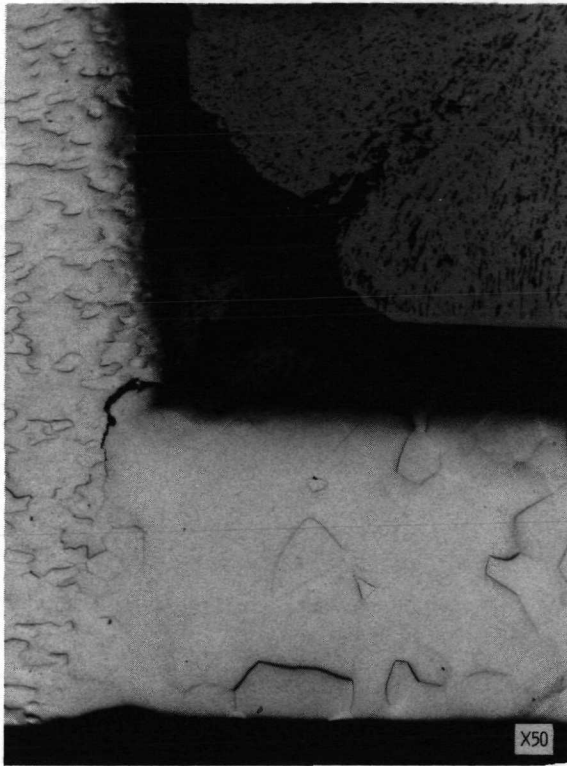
Section of electron-beam welded joint between chemically vapor deposited tungsten cladding and arc-cast tungsten end cap on side opposite failure showing initiation of cracking from inside corner. (Reduced 8 percent in printing.)
